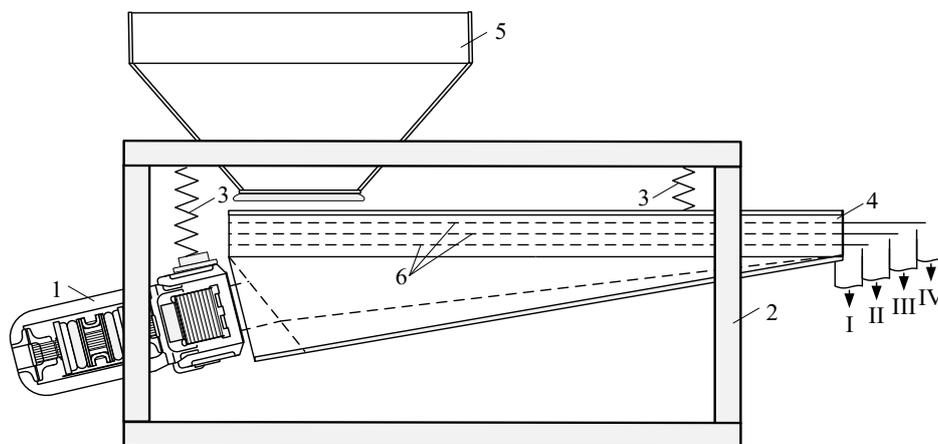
Walnut calibrator with reciprocating electromagnetic vibrating motor.
